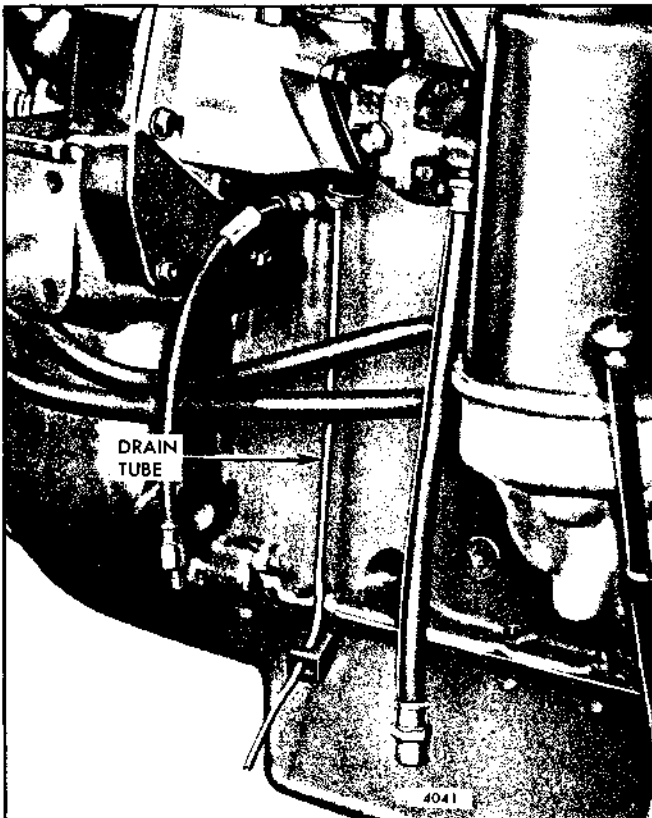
Air Box Drain Tube Mounting (In-Line Engines)
